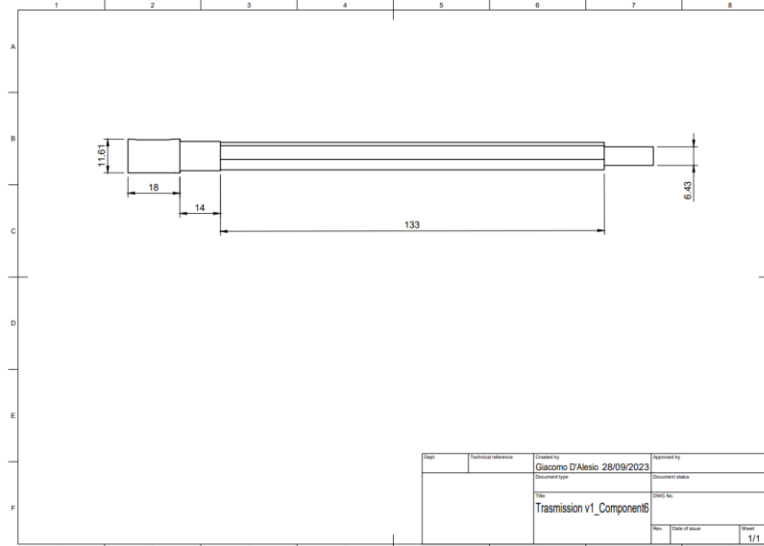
Drawing of the hexagonal prism to hold the textured cylinders.
